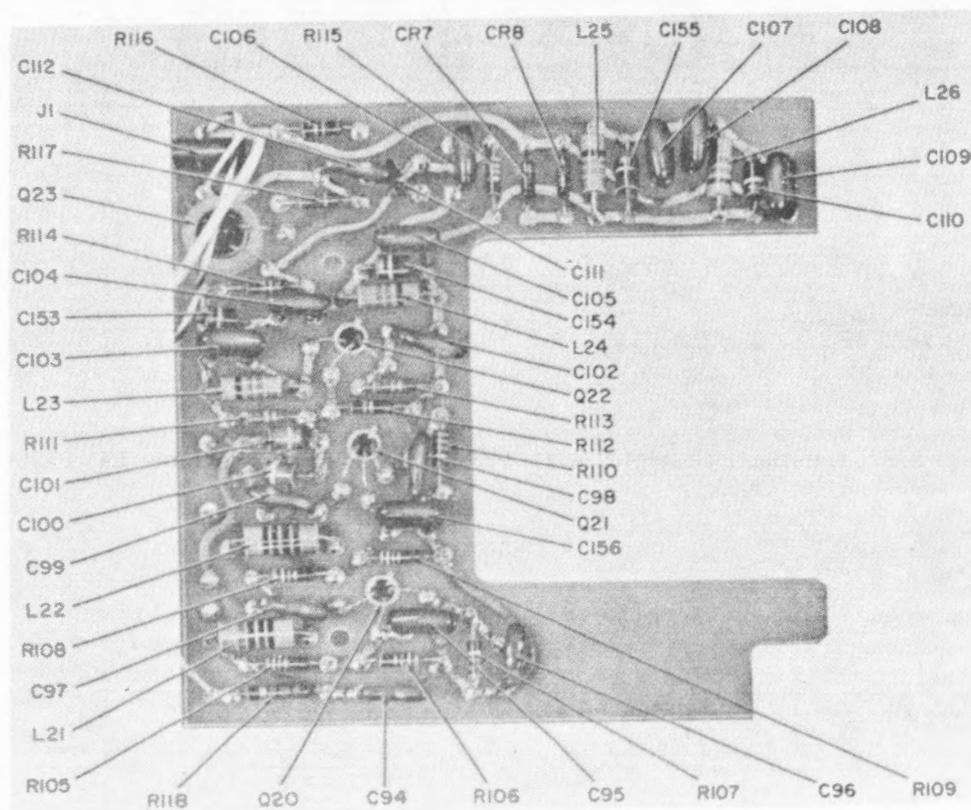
Oscillator Control C-4311/PRC-47 (A7), Card Assembly E6, Parts Location
